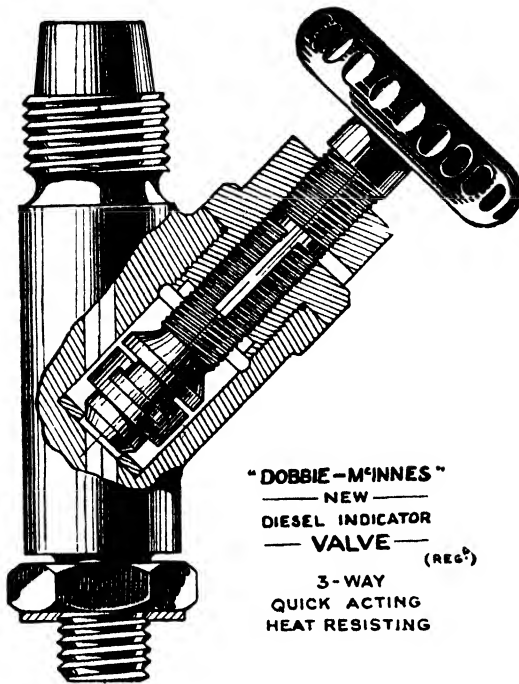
“ DOBBIE-McINNES ” DIESEL INDICATOR VALVE, SHOWN CLOSED TO ENGINE AND INDICATOR, OPENED TO ATMOSPHERE
